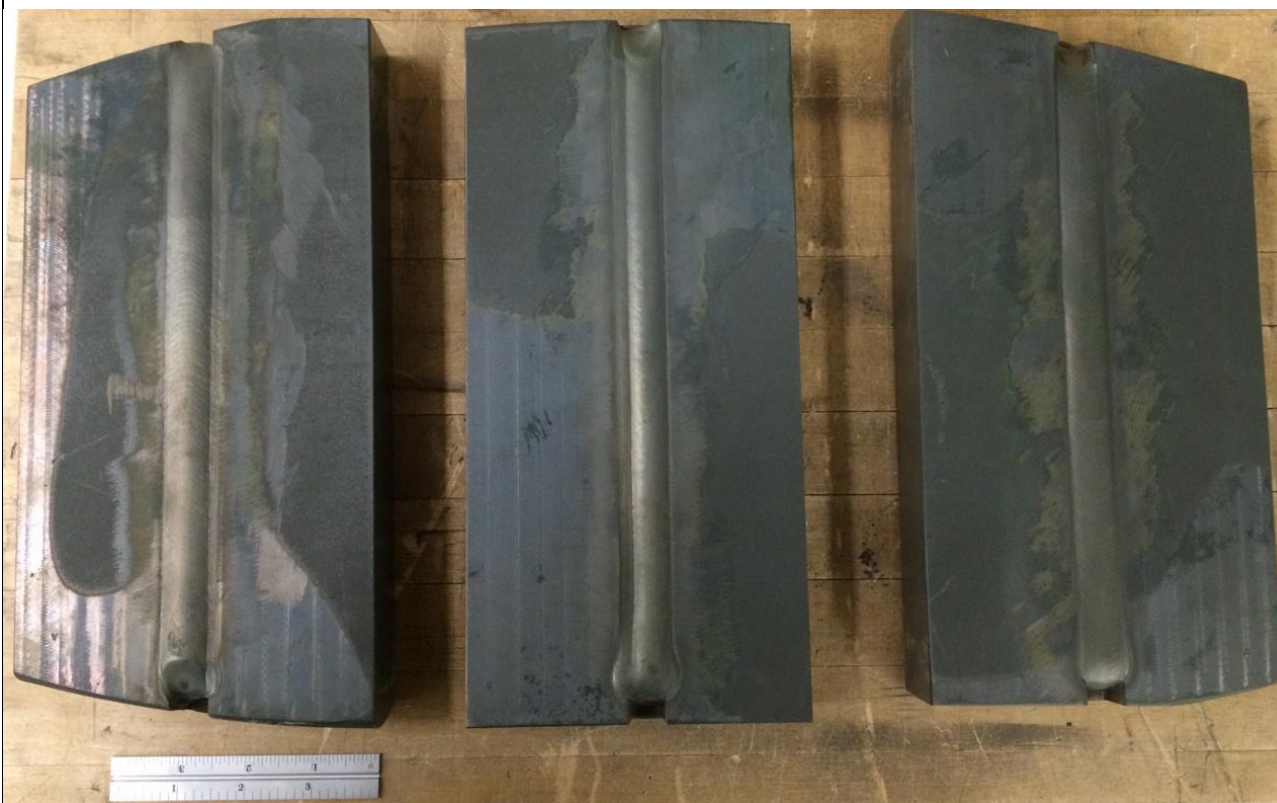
Photograph of the three welds completed in July with the groove design shown in Fig. 1.
